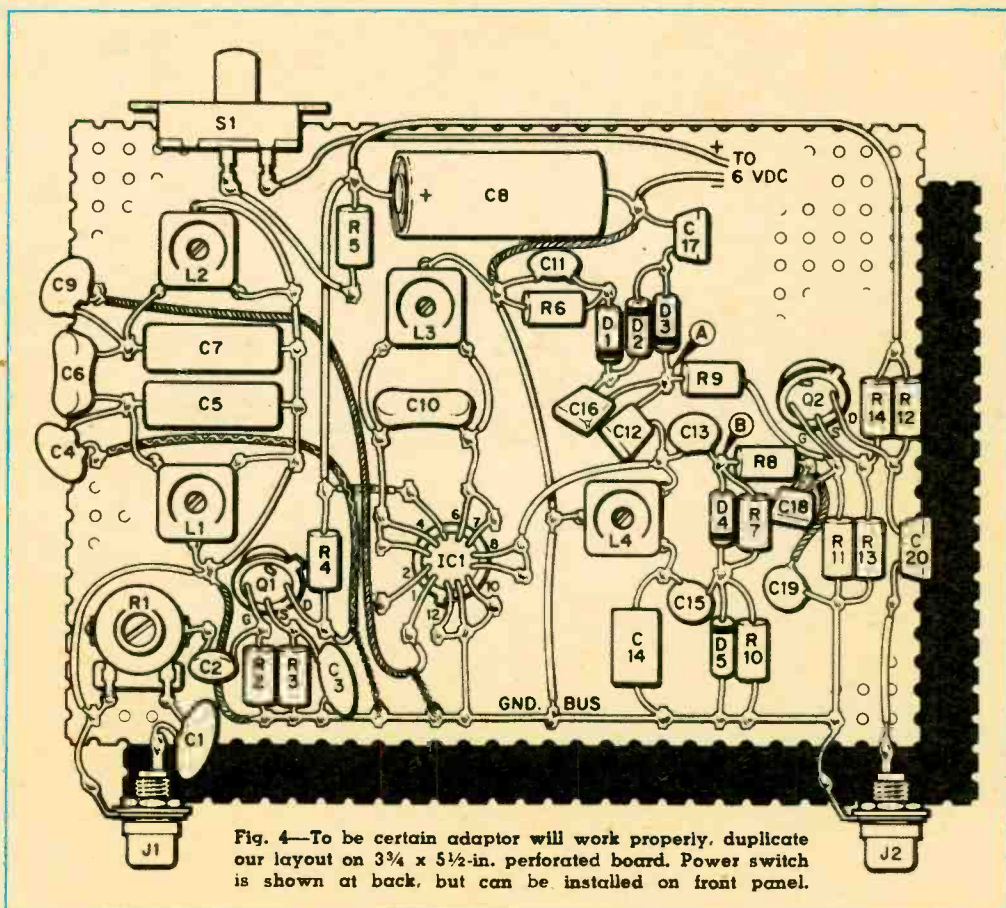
To be certain adaptor will work properly, duplicate our layout on  $3\frac{3}{4} \times 5\frac{1}{2}$ -in. perforated board. Power switch is shown at back, but can be installed on front panel.
